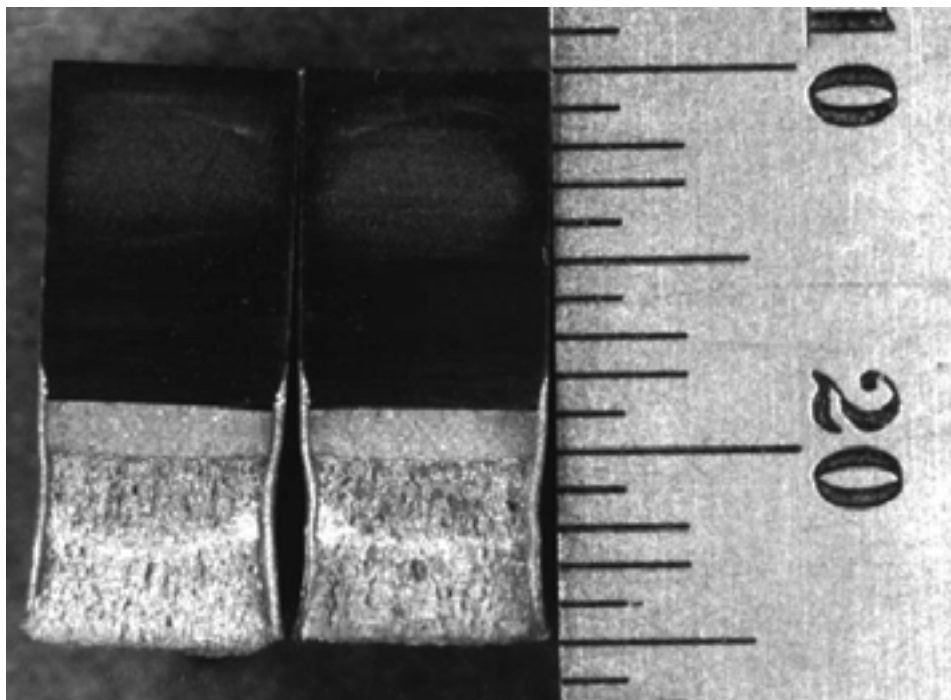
Fracture surface of specimen L2-E tested at 288°C
